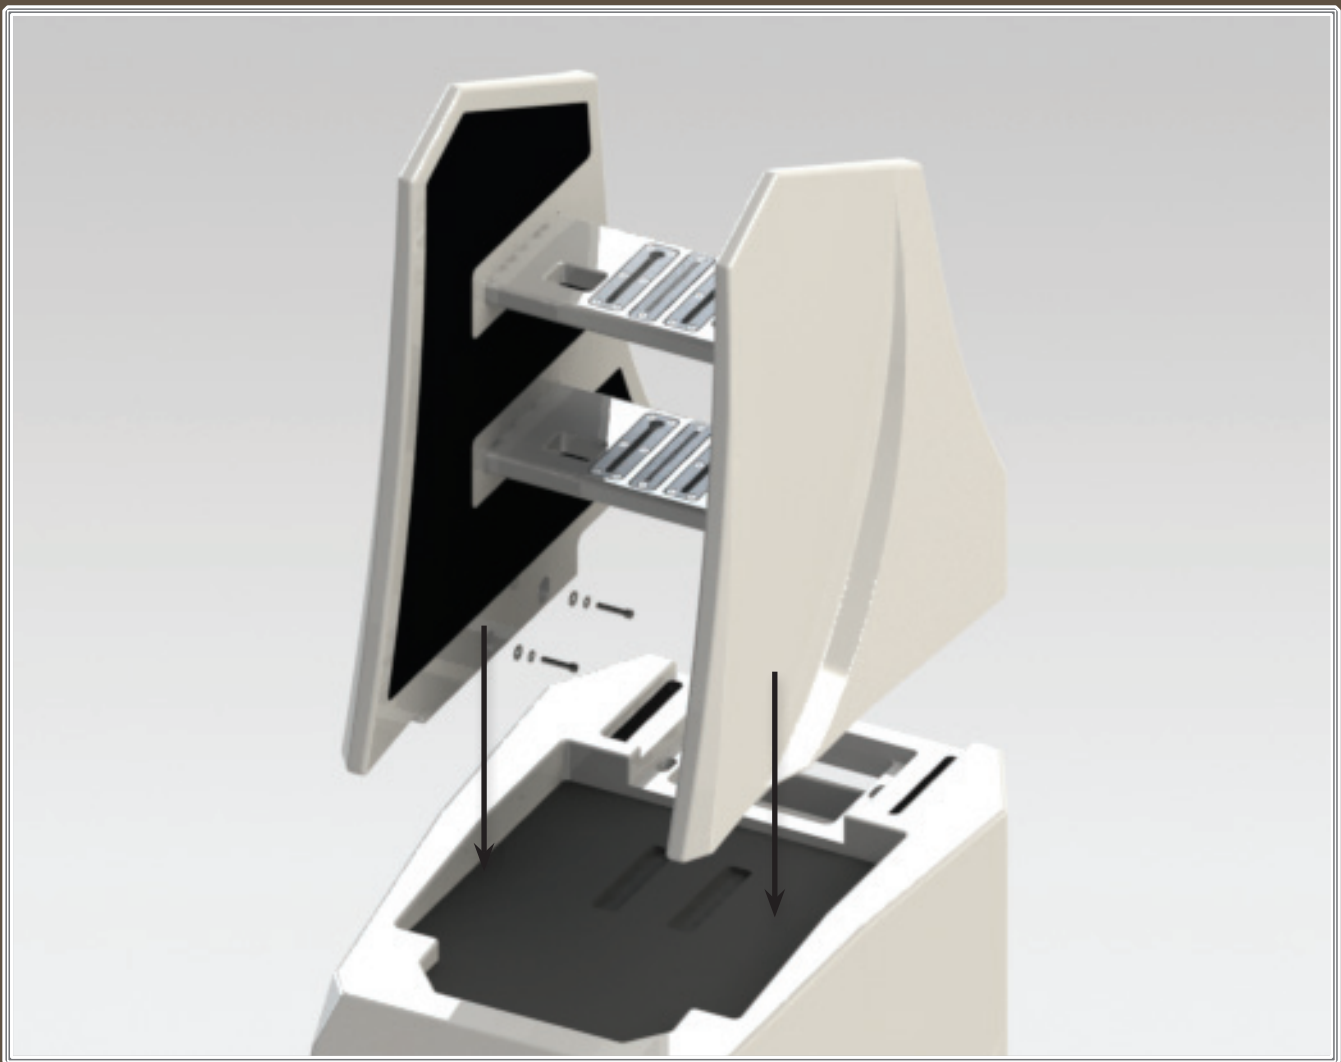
CAREFULLY INSTALL WING ARRAY AND BOLT IT TO THE WOOFER MODULE.
